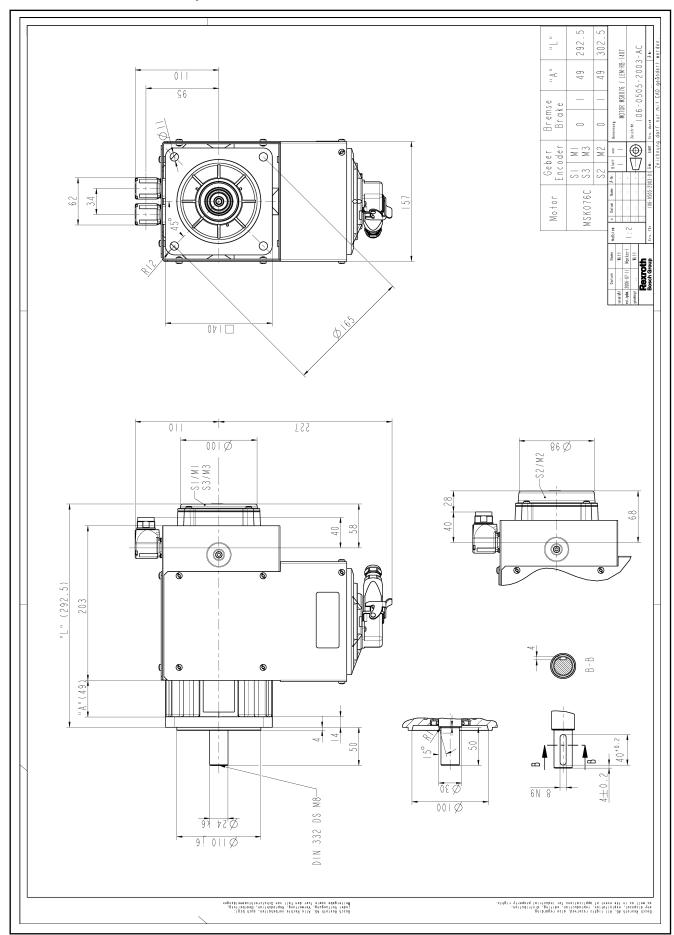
Dimension sheet MSK076 with radial fan unit
